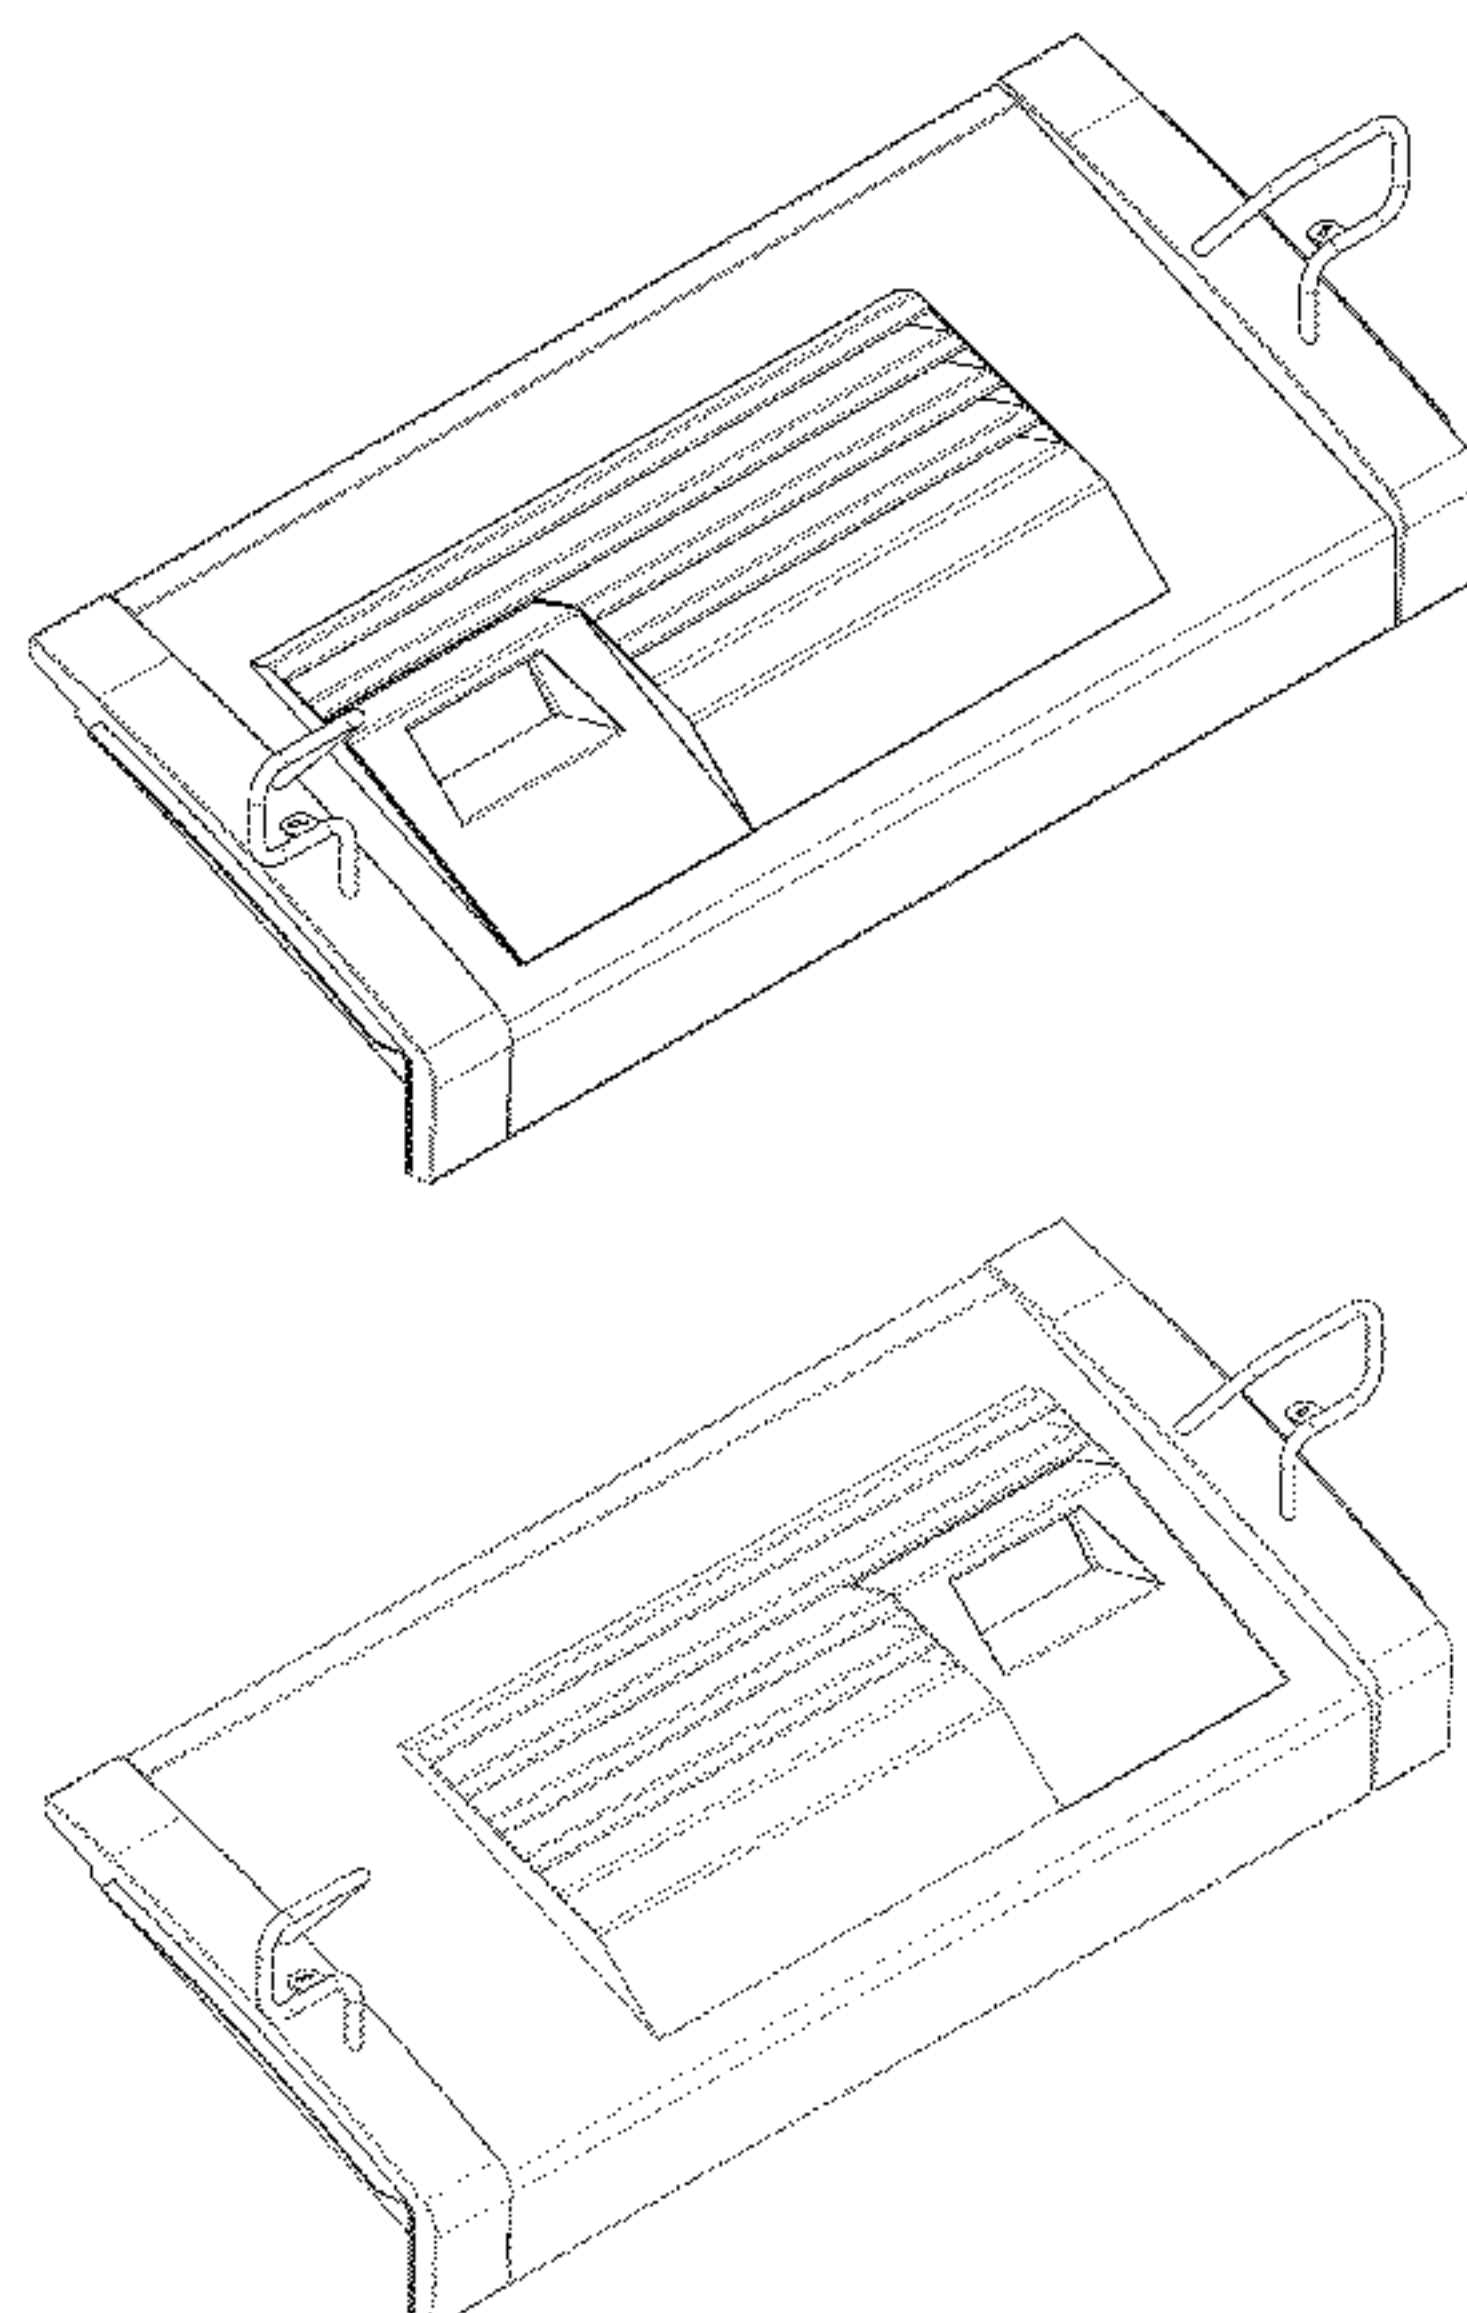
is a top side view of a second embodiment of the design for a hood for road construction machine of FIG. 9.
